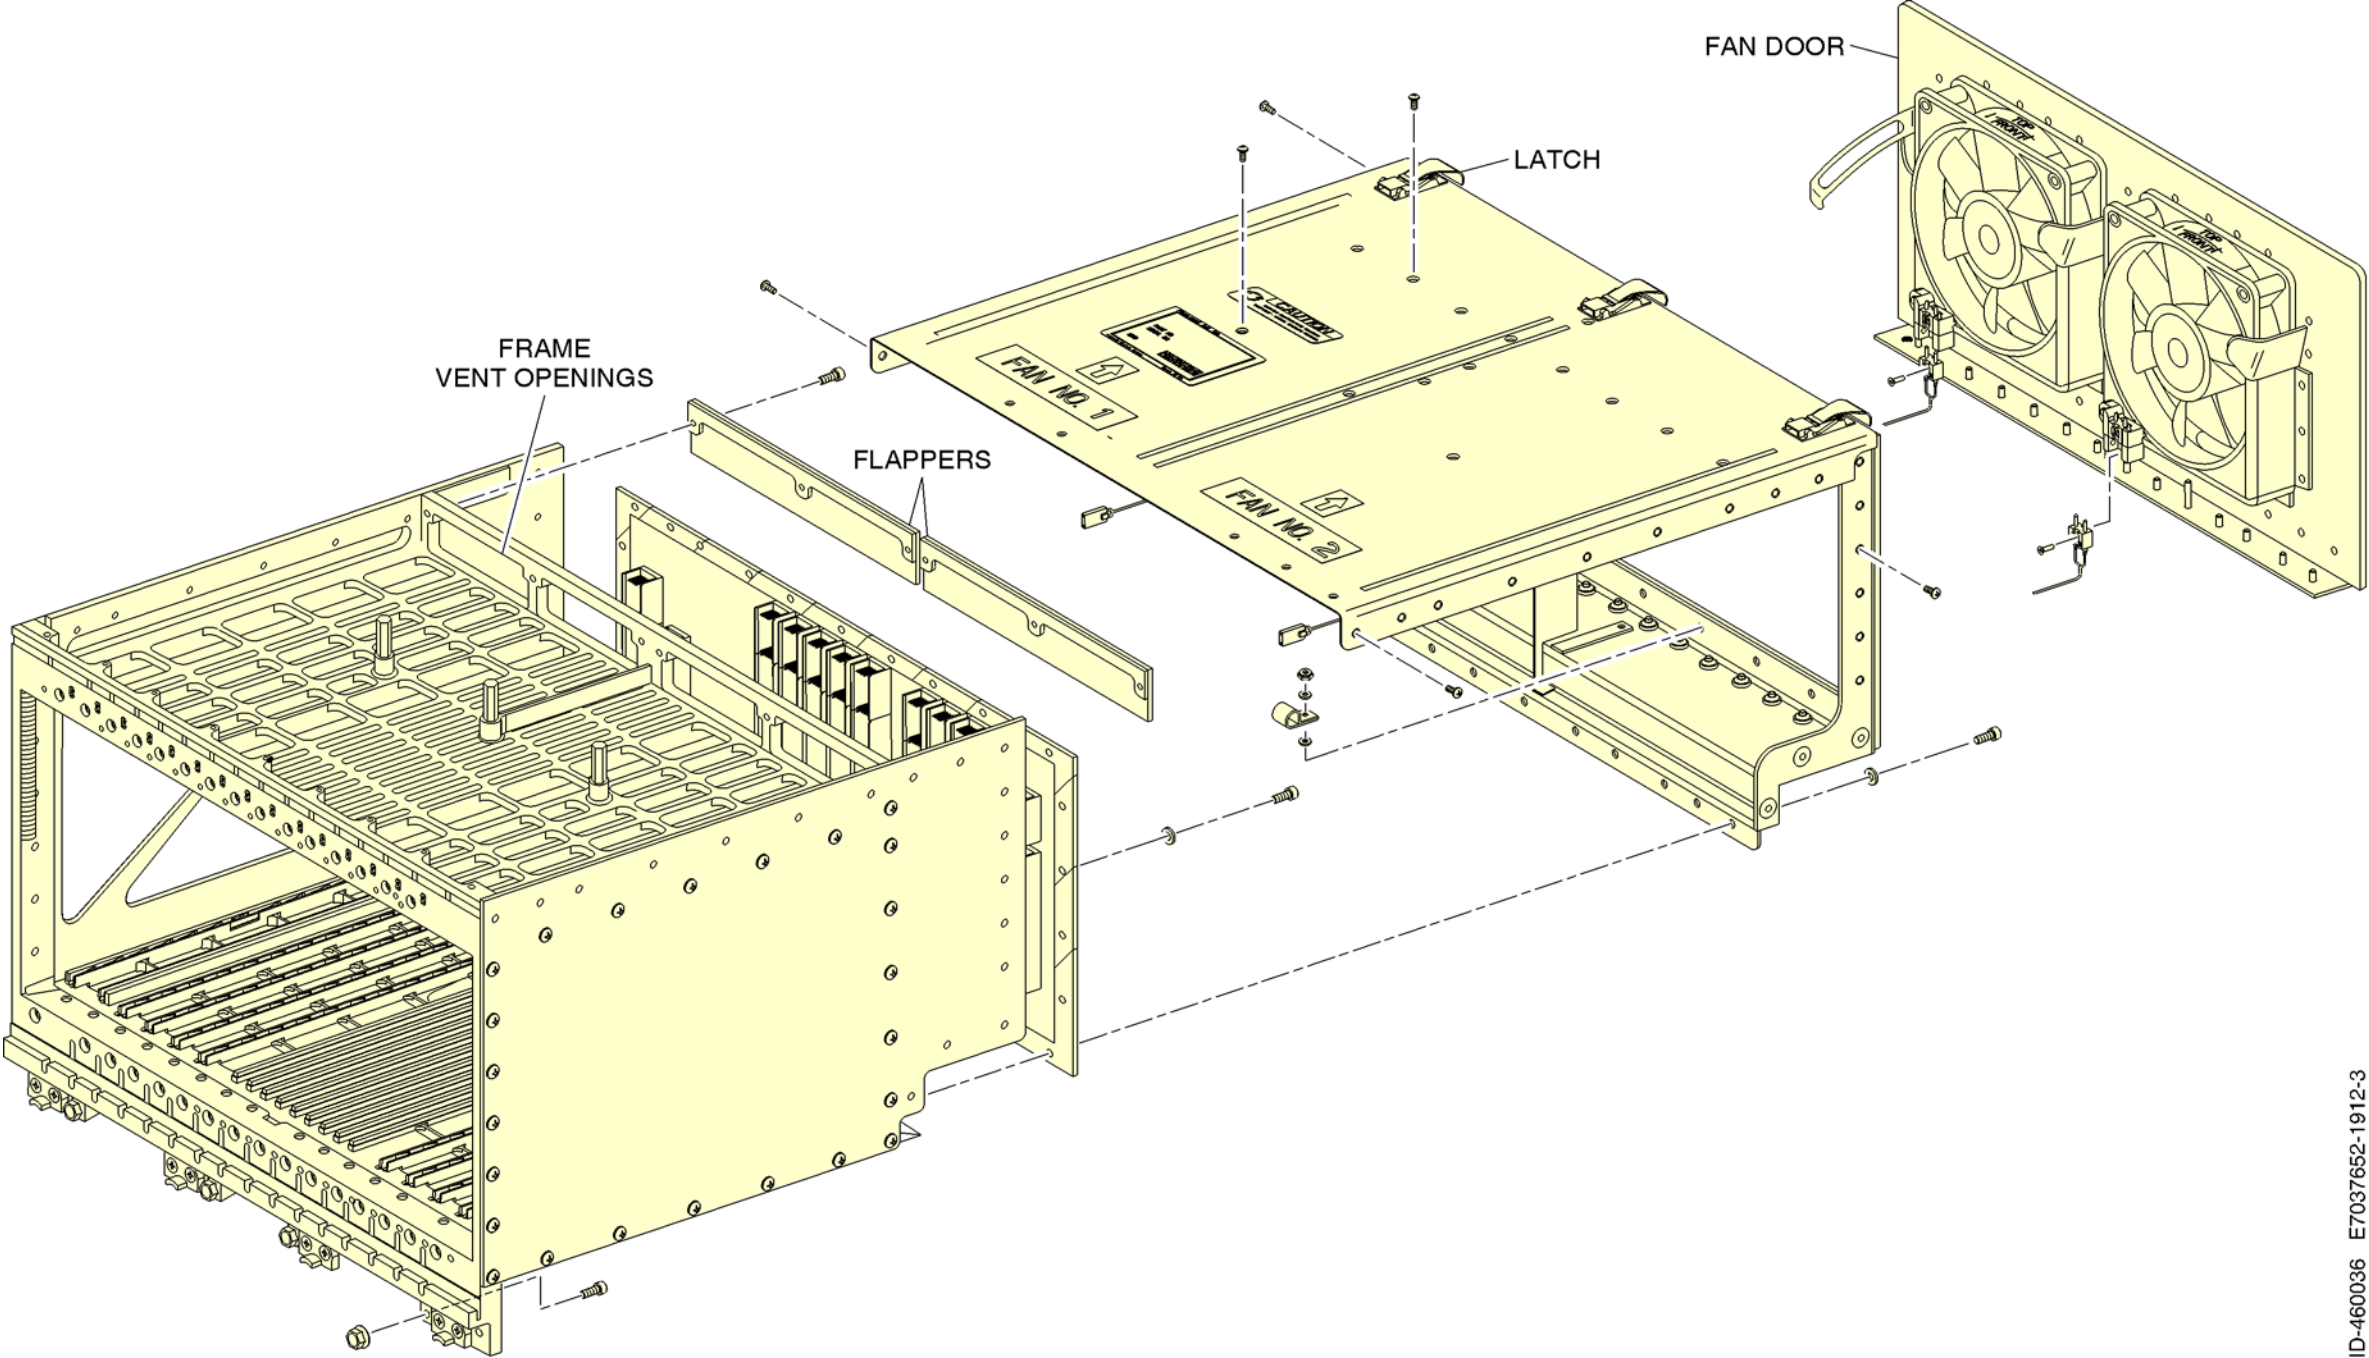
(Sheet 1 of 1) MAU-12L Electrical Equipment Chassis
